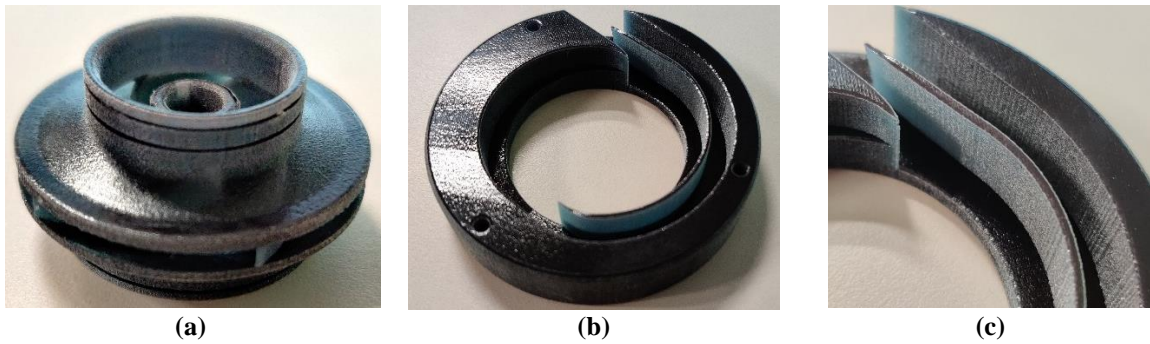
Images of SLA manufactured parts for (a) closed impeller, (b) volute and (c) volute channel
